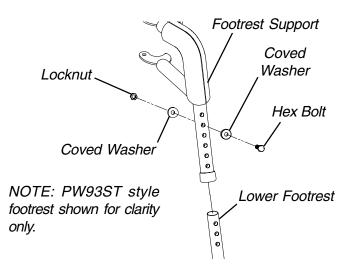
ADJUSTING FOOTREST HEIGHT - ALL FOOTRESTS EXCEPT MODEL P93M FOOTRESTS
